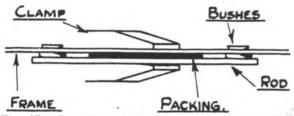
Coupling-rod blank clamped to frame for spotting through.
